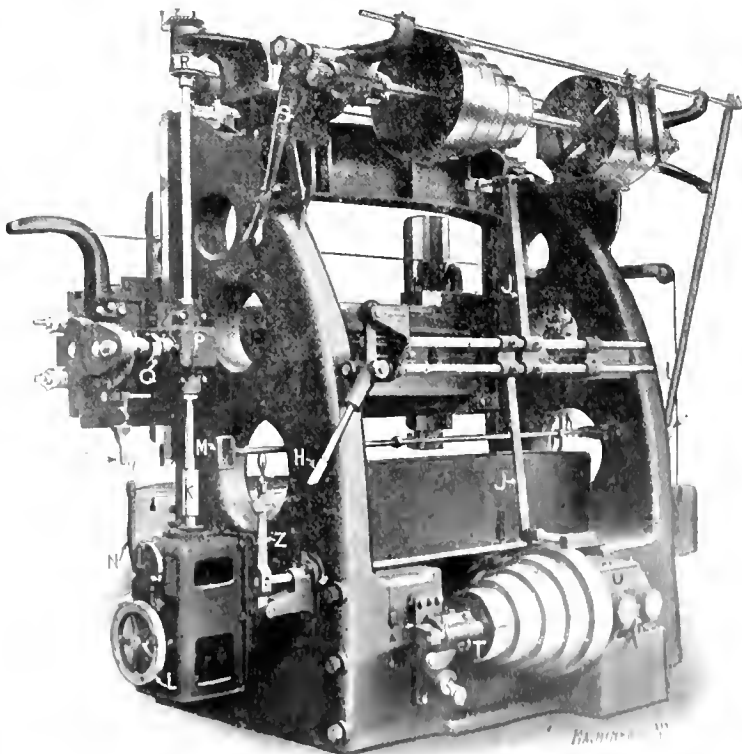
Rear View of "New Model" Boring Mill, showing Main Drive Controlling Handles, Levers, etc
